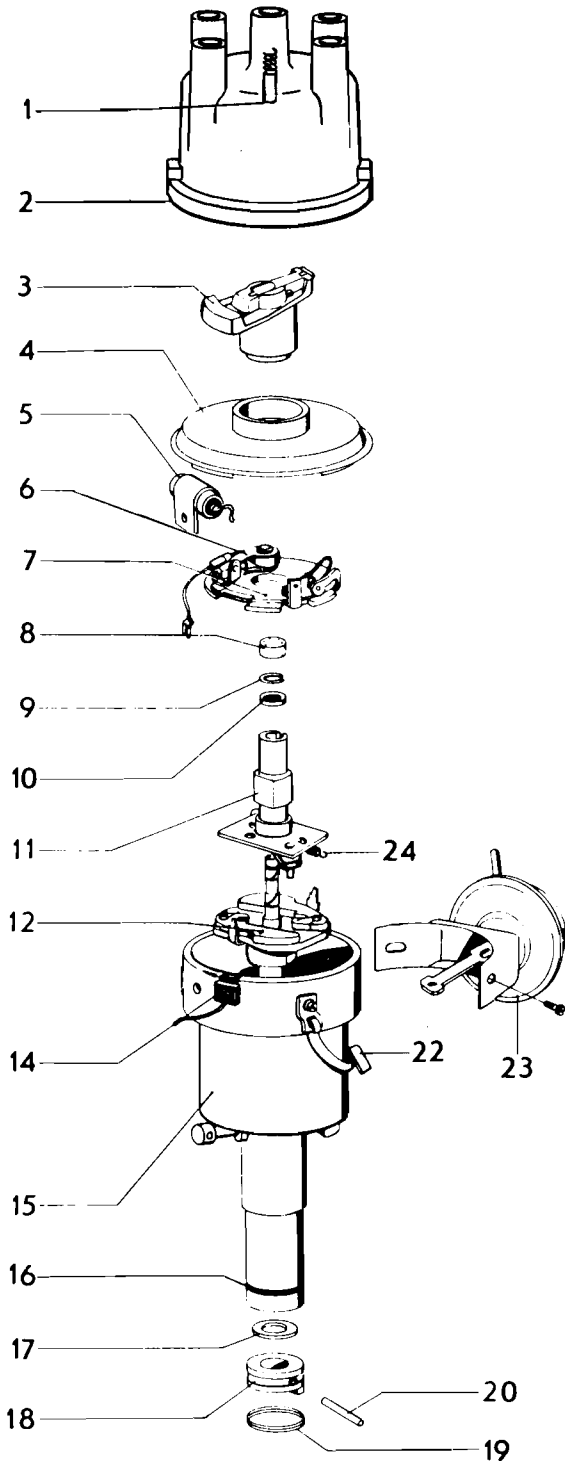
Exploded view of Bosch distributor (Sec 7)
